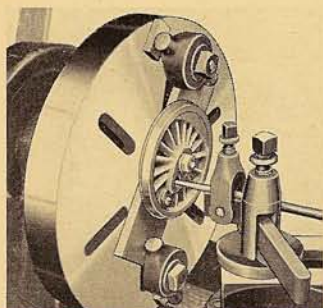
Boring Hub of Wheel in the Lathe for Model Locomotive.
